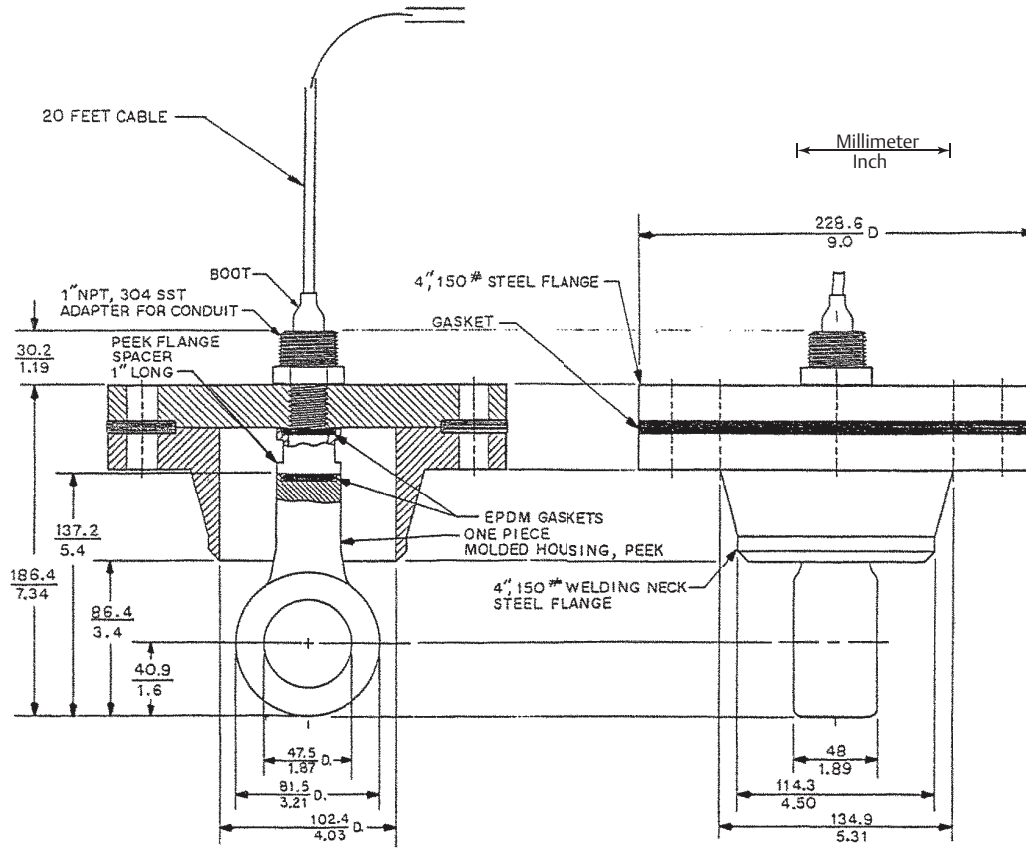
Rosemount 226 with 7/8 in. 9 UNC thread and insertion through flange mounting adapter (-81 option) dimensional drawing
